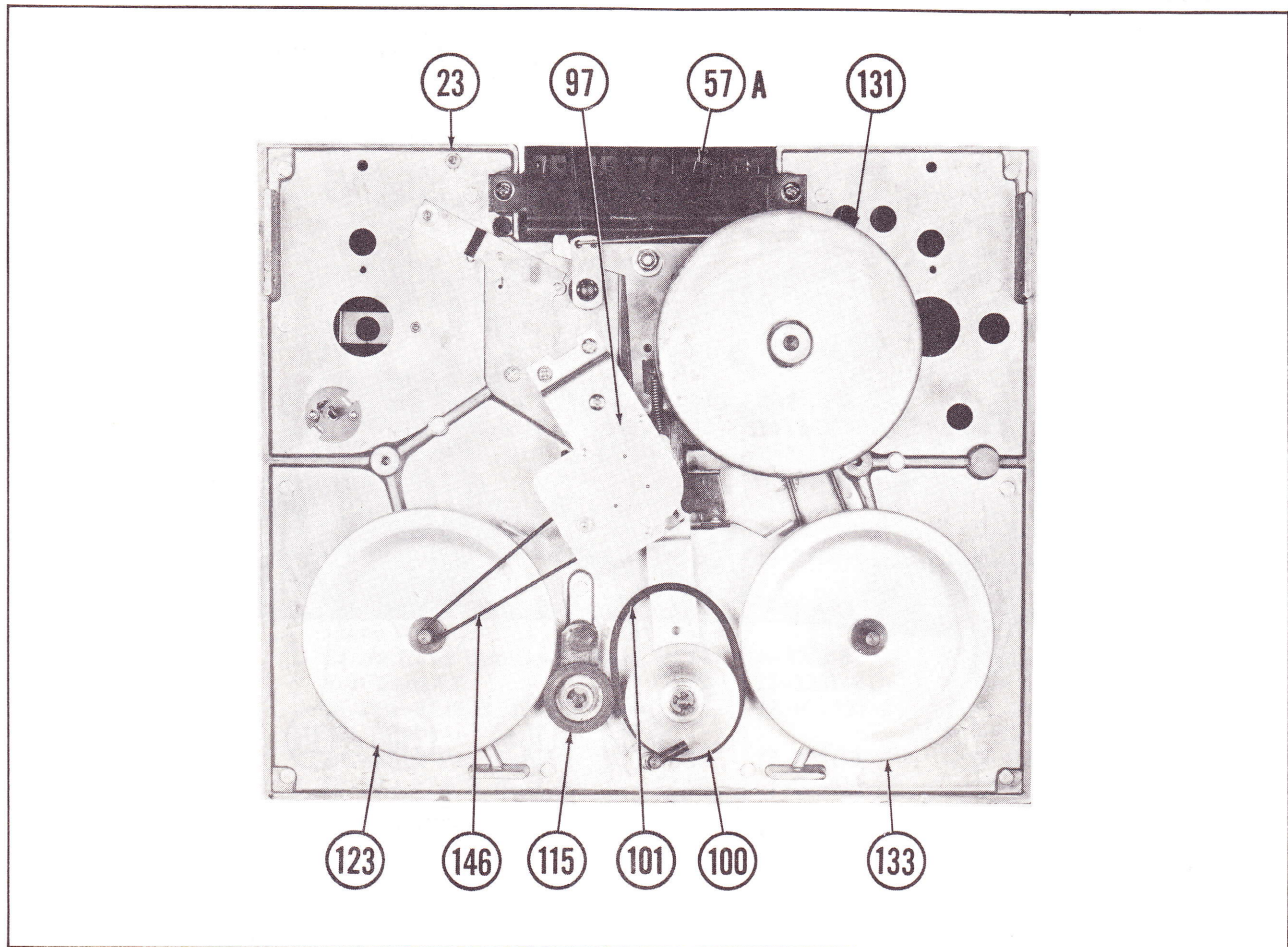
BOTTOM VIEW OF MECHANISM WITH DRIVE PLATE REMOVED
